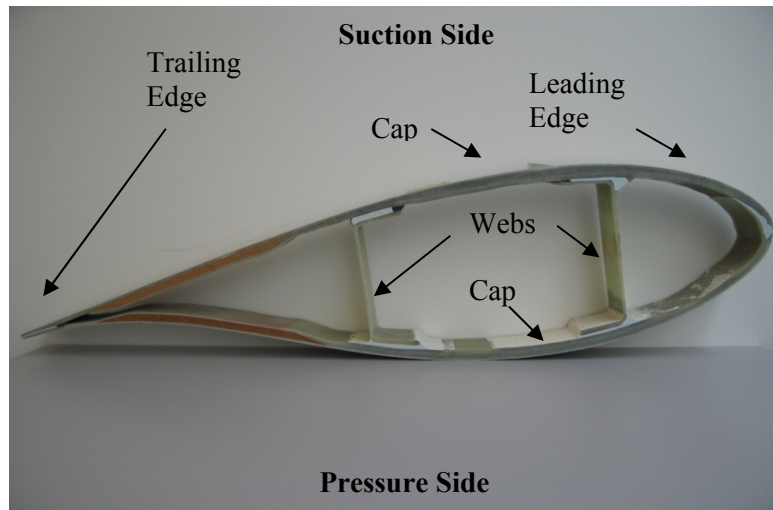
Picture of a blade cross-section, indicating construction elements.
